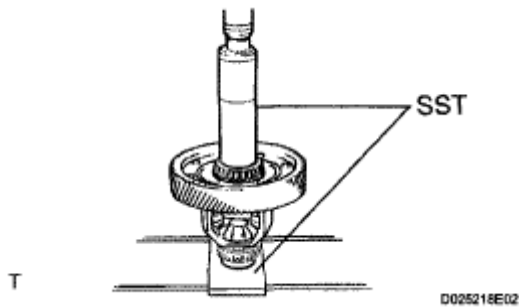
Installing Front Differential Case Front Tapered Roller Bearing To Differential Case
